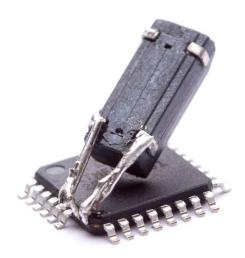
Crystal Soldered to 100-Pin TQFP Package with Narrow Pin Pitch
